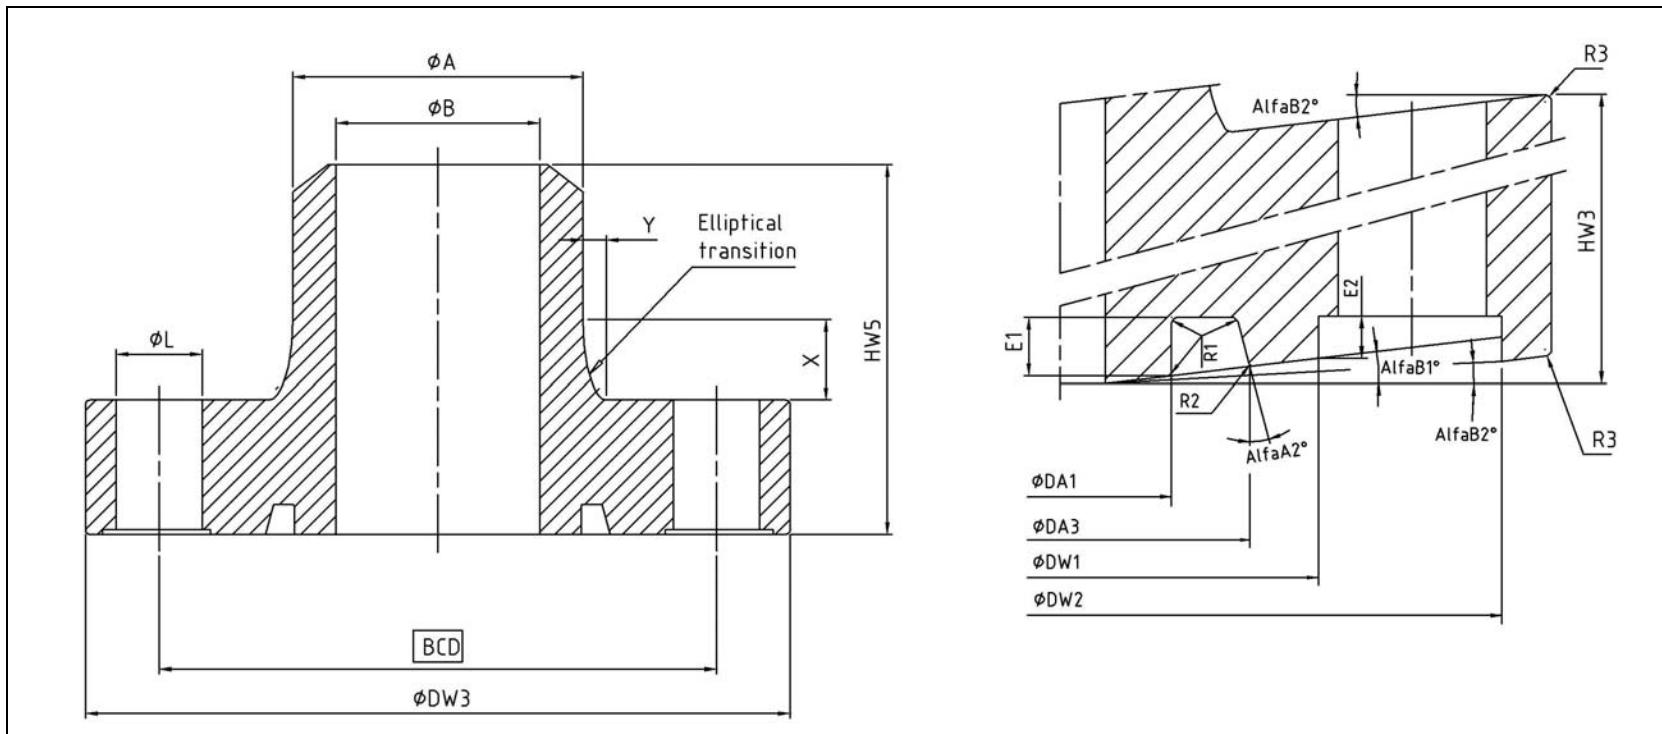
Nomenclatures for weld neck (WN) flanges
